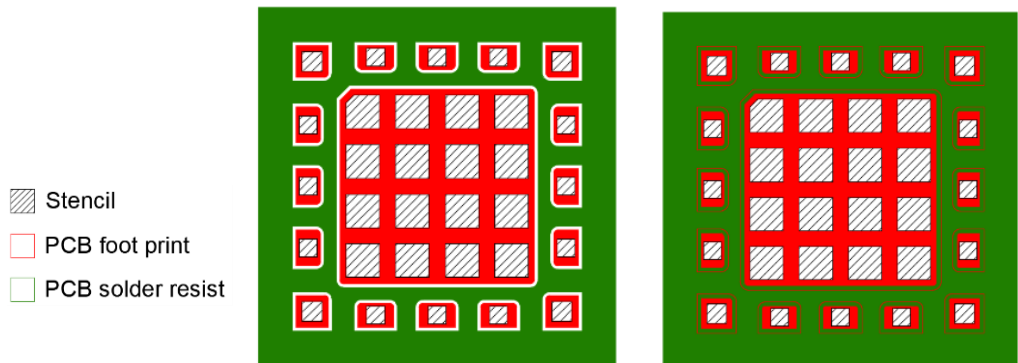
Solder paste printing on NSMDP (left) and SMDP (right)
